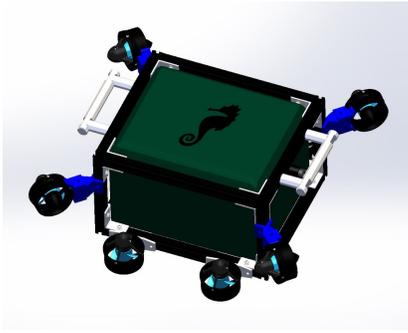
BLOCK III (Seahorse), the latest vehicle for 2019. The body consists of a small waterproof case, aluminum extrusion frame, 3d printed thruster mounts and steel handles.
